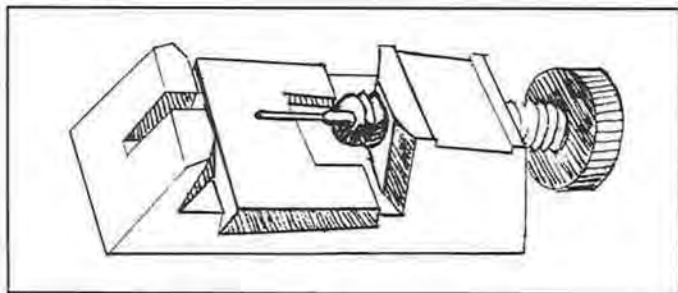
Euro Tool #HOL 118.00 link pin remover.
